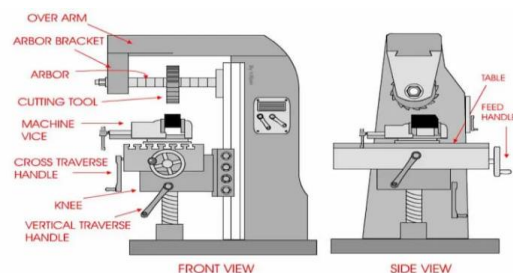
Parts of a VMC (Vertical Milling Machine)
